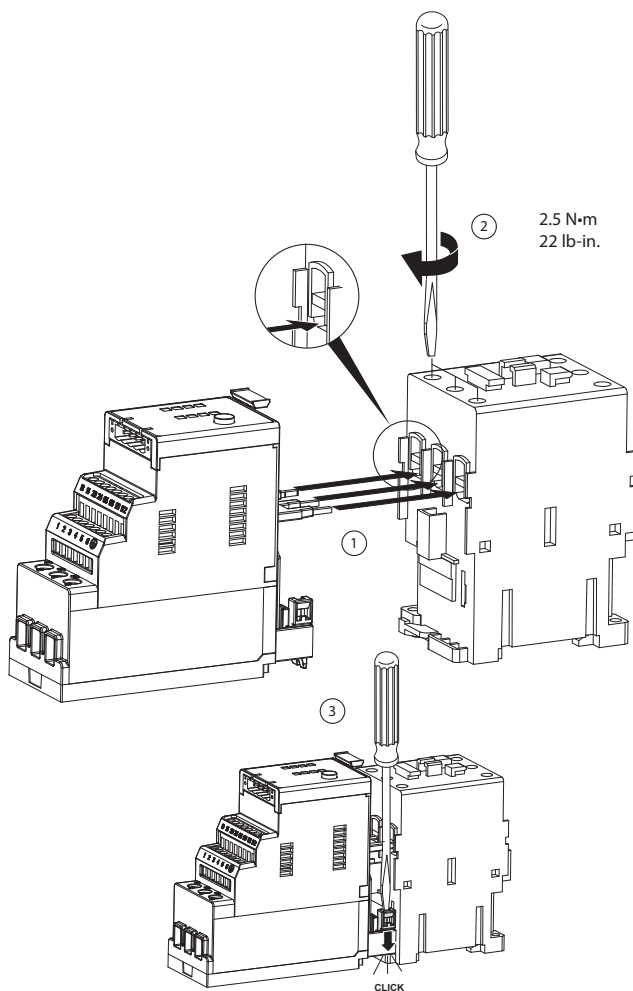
CA7-60...-85 Starter Assembly Instructions (for use with Cat. No. CEP7-C_-85_).
